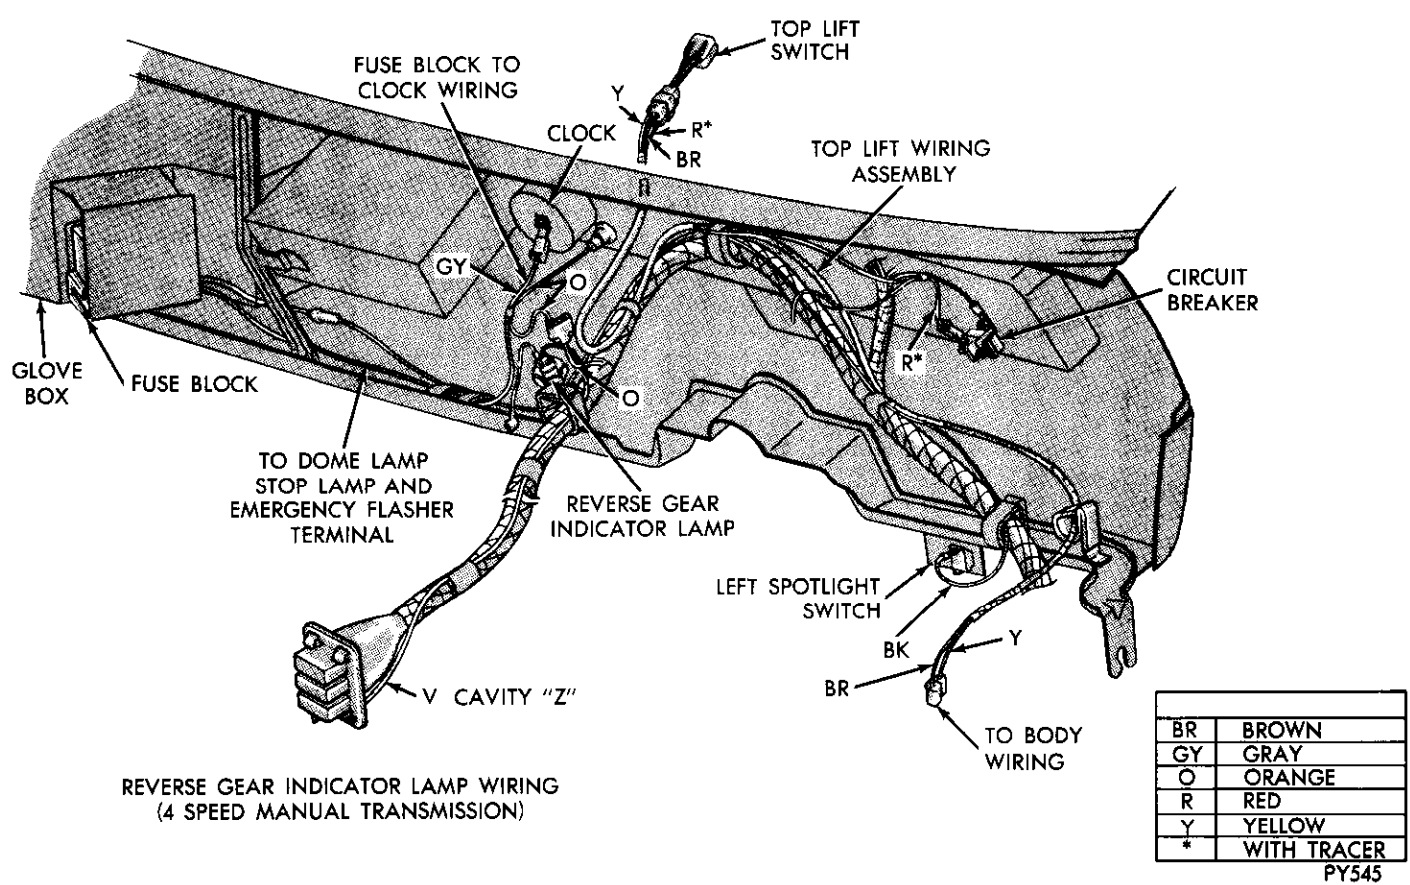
Clock, Reverse Gear Lamp, Emergency Flasher Wiring—Coronet-Charger
